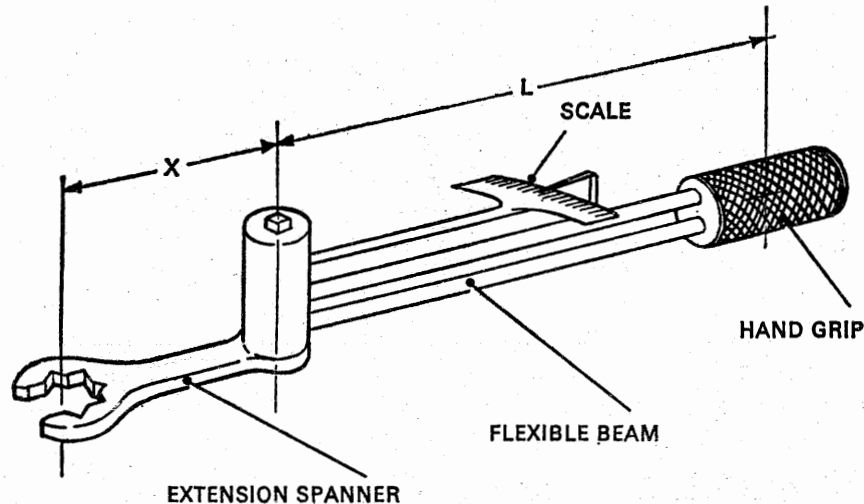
TYPICAL BEAM-TYPE TORQUE WRENCH
